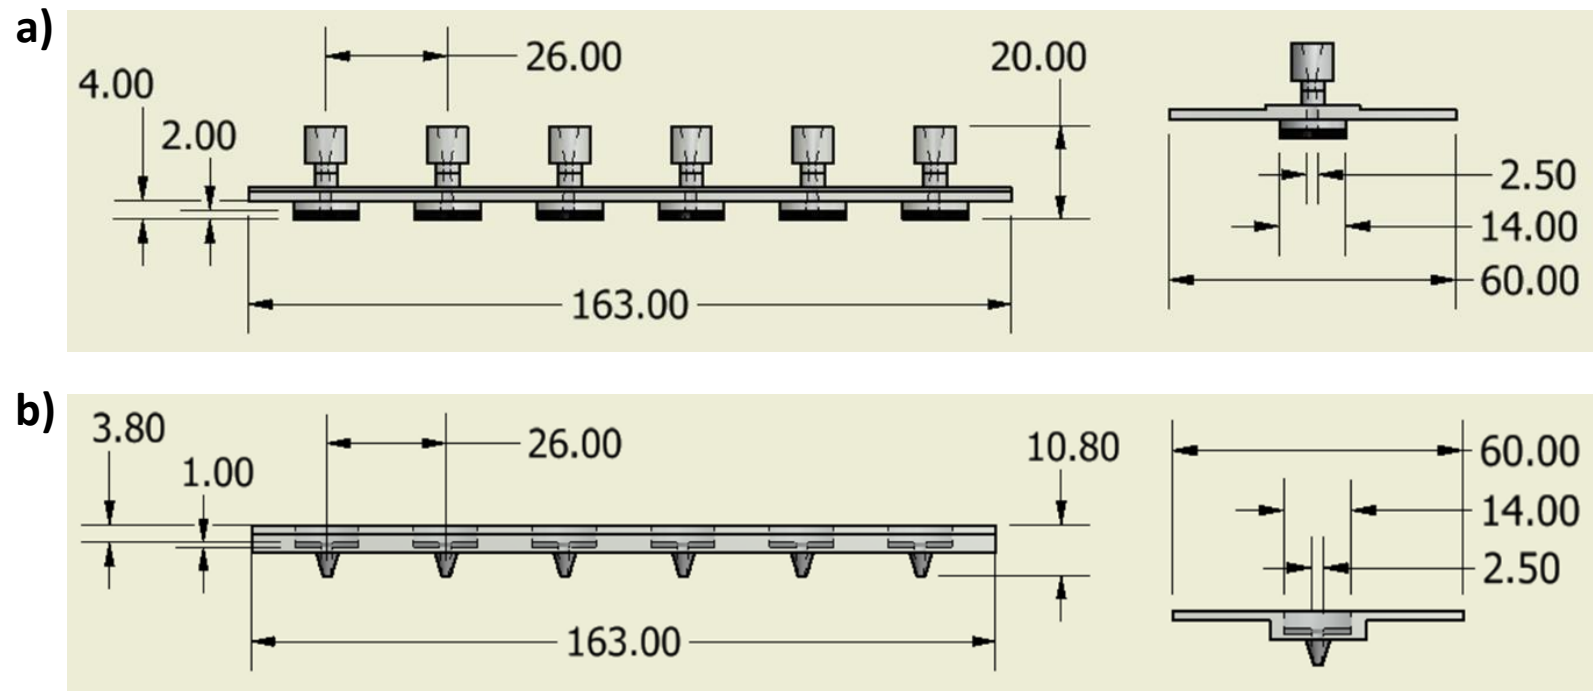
The design of the membrane based deformability analysis device. a) Engineering sketch of the upper part of the device with dimensions (mm); b) Engineering sketch of the lower part of the device with dimensions. The printed device is composed of two different materials, a semi-transparent clear material and a black rubbery material. Polycarbonate membranes were placed on the black material areas. The two parts can be assembled together before deformability measurements. There are 6 ports on the device, enabling a high throughput deformability analysis. The diameter of the channels is 2.5 mm, which means the area of filtering RBCs is approximately 19.6 mm².
